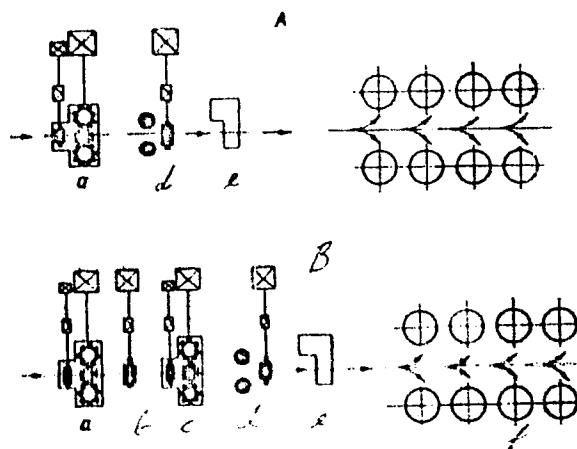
A layout of main equipment of shop for rolling small shapes from the billets obtained by continuous casting: (a) universal planetary mill; (b) continuous-shape mill; (c) flying shears; (d) coolers; (e) press-shears; (f) roller straightening machine; (g) collecting pockets.
